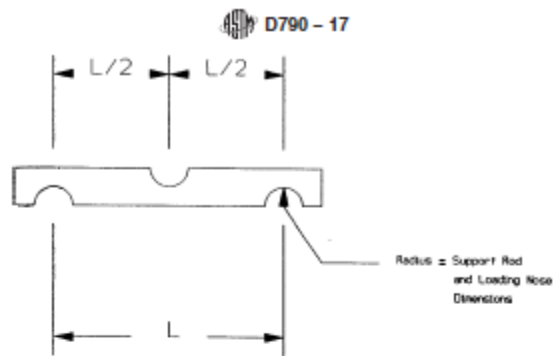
Fixture Used to Set Loading Nose and Support Spacing and Alignment
